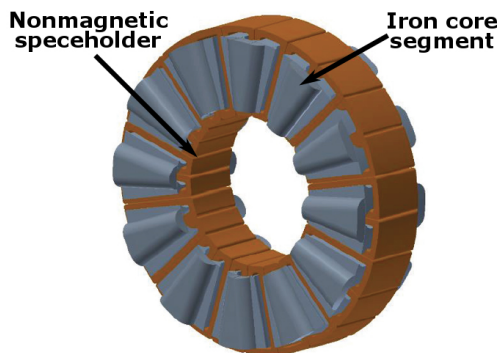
The rotor of the high-speed axial flux doubly segmented SRM [28]
